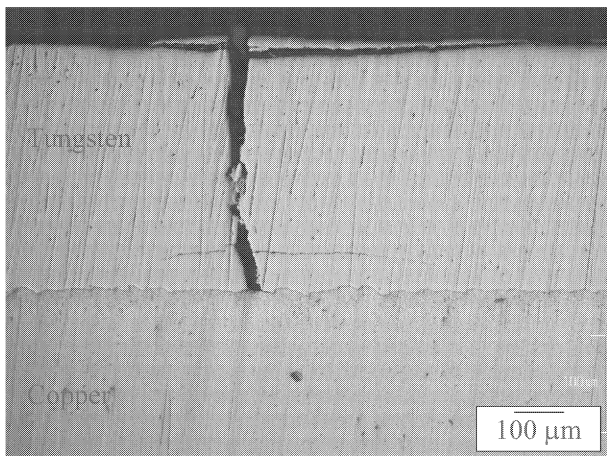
Crack found in relatively thick W plate (0.5 mm-thick) welded onto Cu base for experiment #WC4.
